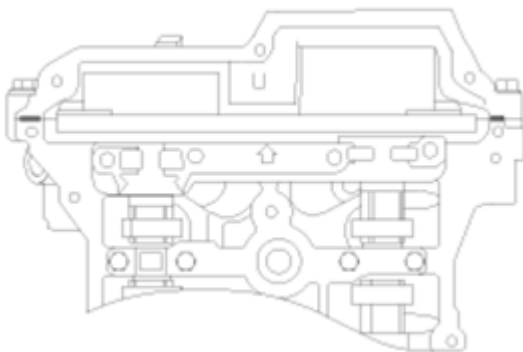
Identifying Sealant Applying Areas Of Cylinder Head Cover
